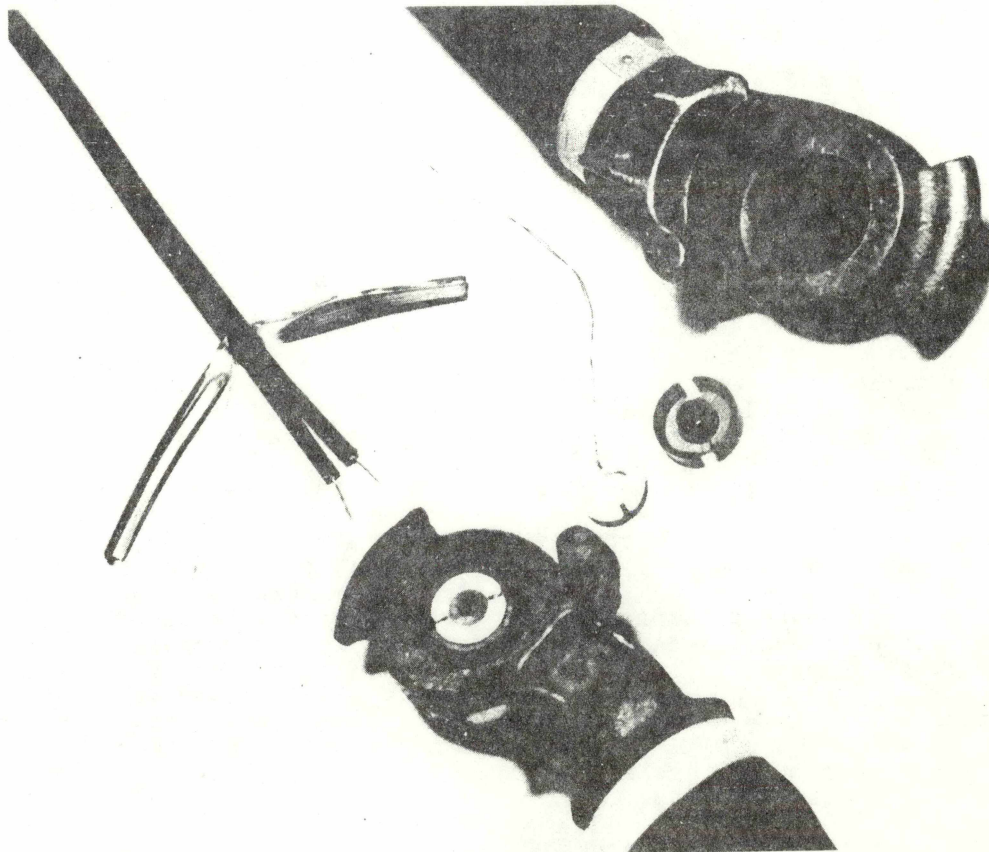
THE "GLAD-HAND" INDUCTIVE COUPLER. THE LOWER SECTION SHOWS THE COIL AND POT-CORE IN PLACE WITH THE RUBBER FACE OF THE PLUG REMOVED FOR THIS ILLUSTRATION. AT CENTER IS THE BOBBIN AND POT-CORE. AT THE UPPER LEFT-HAND CORNER IS THE SHIELDED TWO WIRE TRANSMISSION LINE [2]
